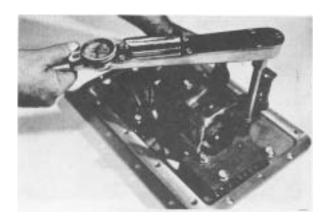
Tighten front and rear support capscrews 20 to 25 ft. lbs. torque [27,2 - 33,8 N,m]. Tap 4th & 5th shift fork and rail assembly forward to a neutral position.
